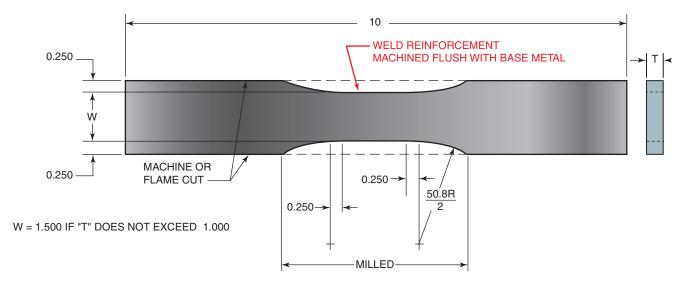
Tensile specimen for flat plate weld.
